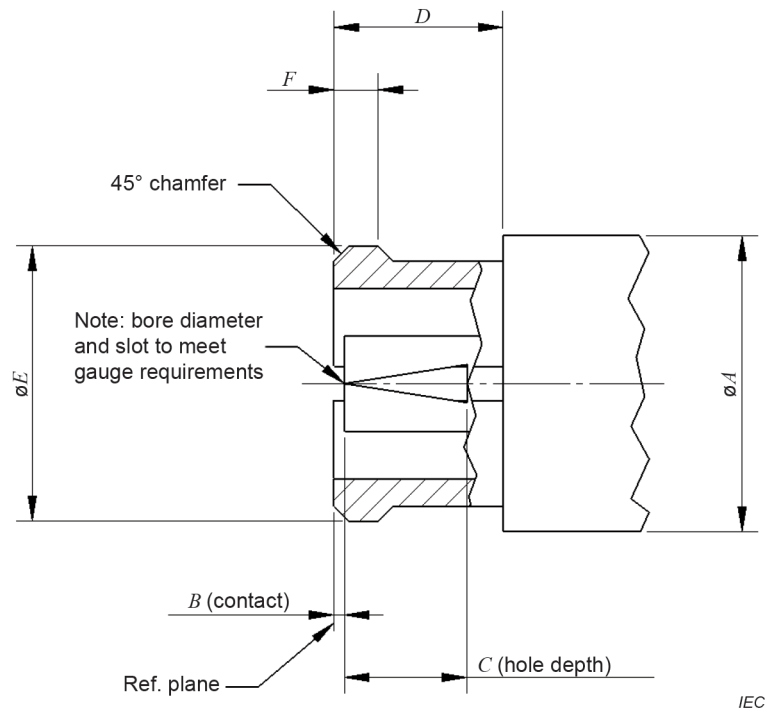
SMP3 connector with pin-centre contact – Smooth bore
